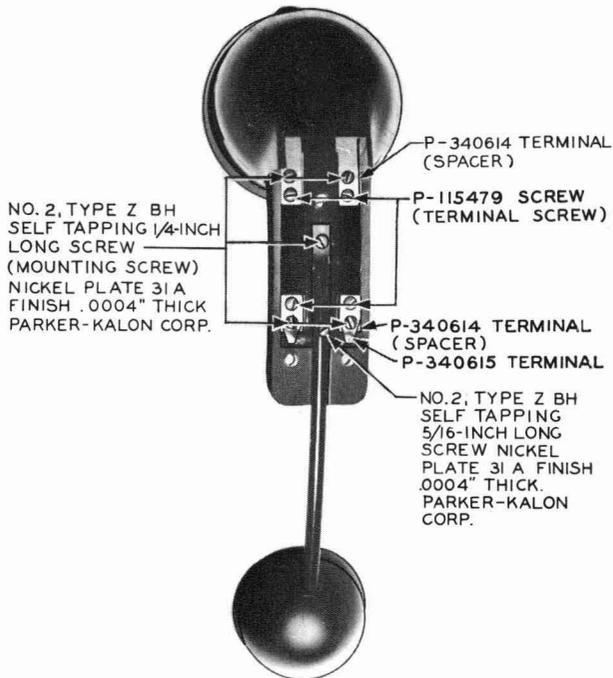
Handle and Transmitter Arm Assembly With Handle Cover Removed—No. 53A, 53C, 53AR, 53DR, 53ER, and 53GR Head Telephone Sets
